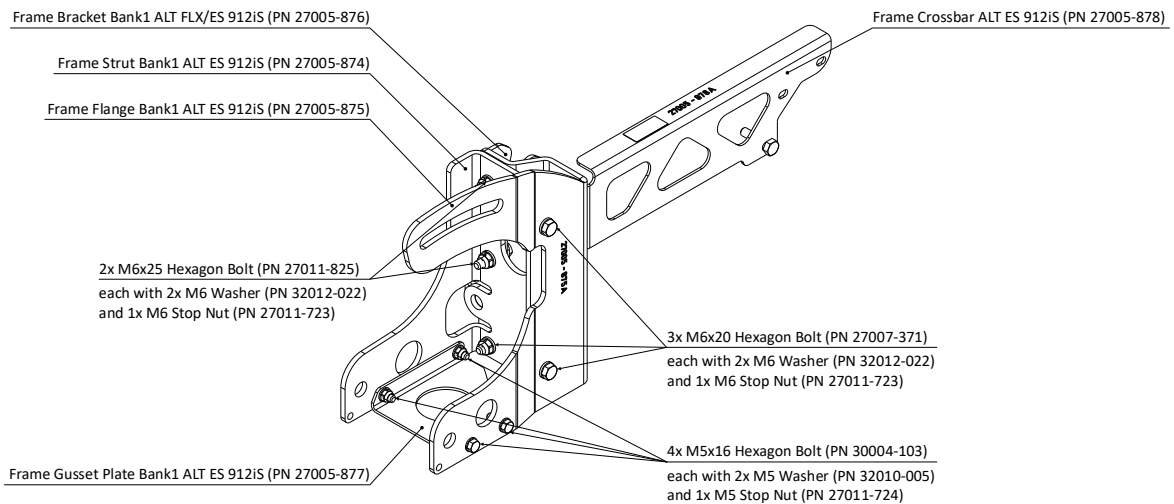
Isometric View Ext. Double Alternator Kit 2x 70A Rotax 912iS Frames Bank1
